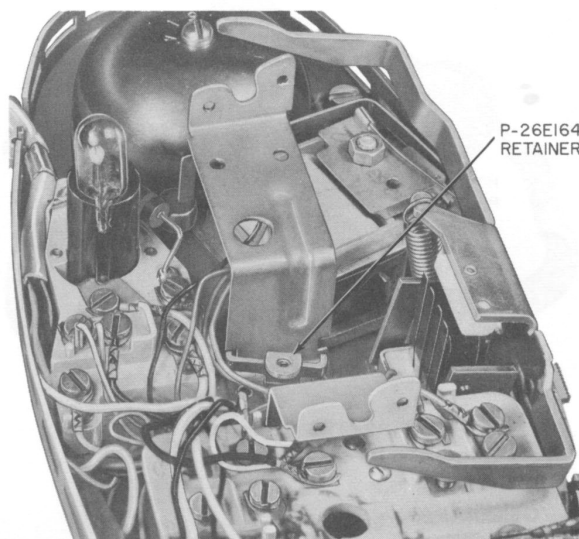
Installing Terminal Board Retainer in PRINCESS Telephone Set
